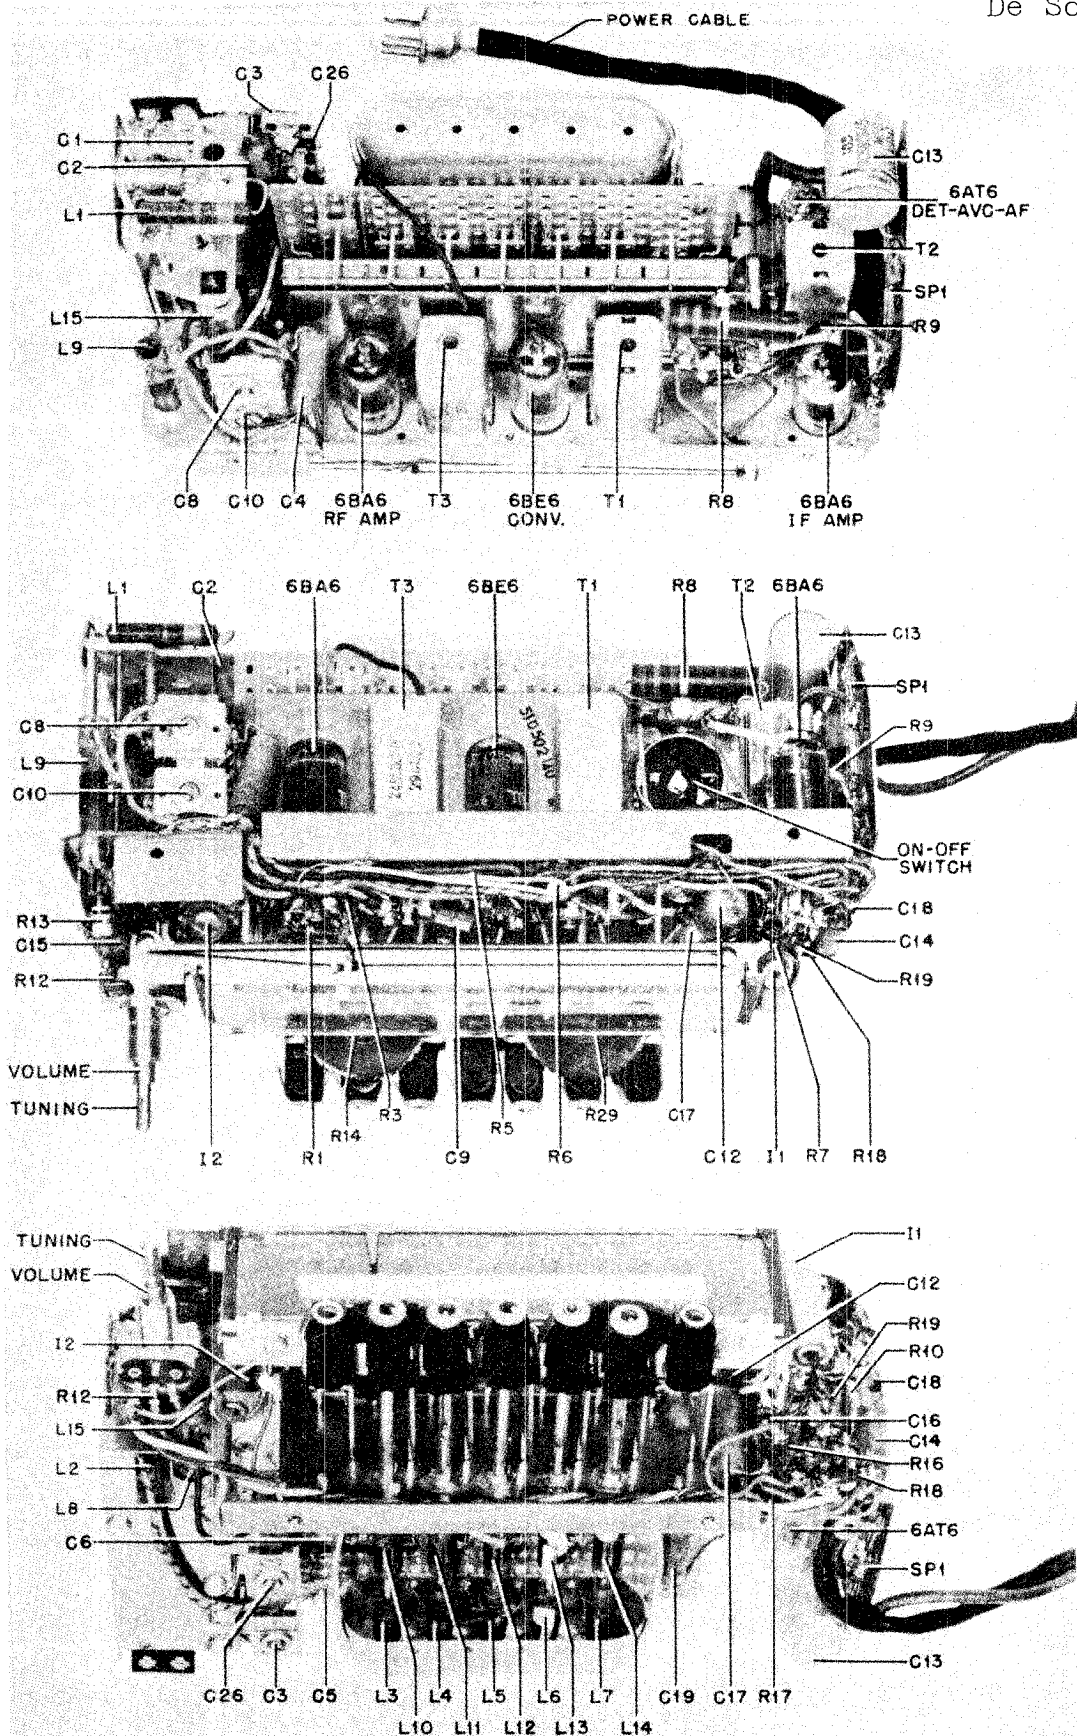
PARTS LOCATION - CONTROL UNIT
